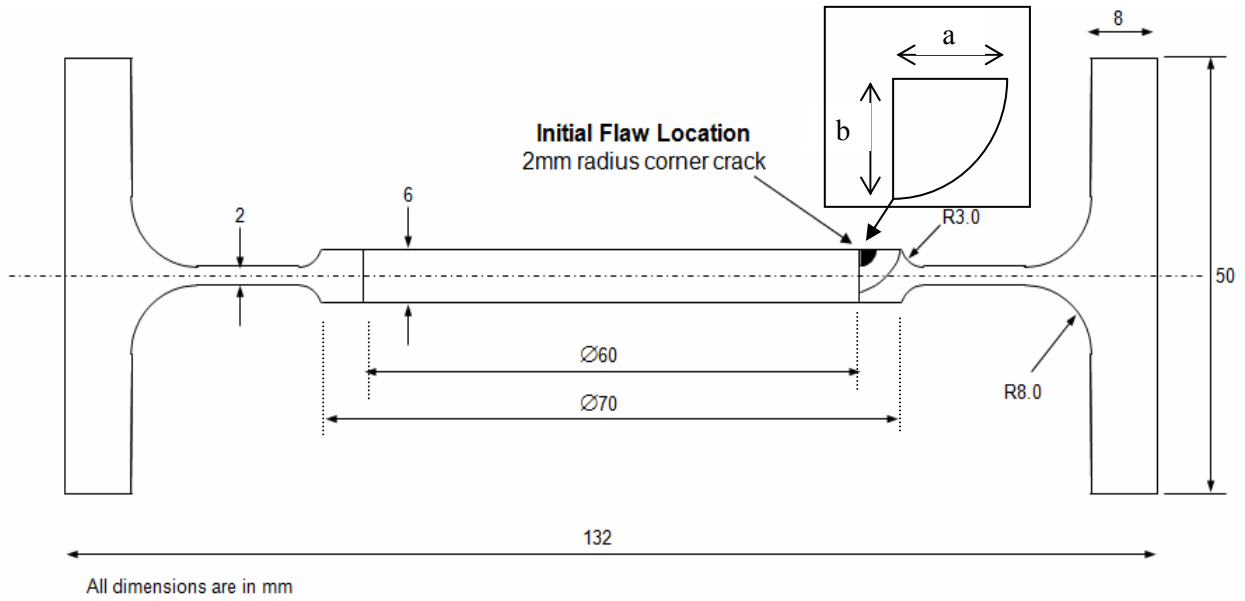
A flanged plate with central lightening hole with and a corner crack, all dimensions are in 'mm' (Ref. [65])
